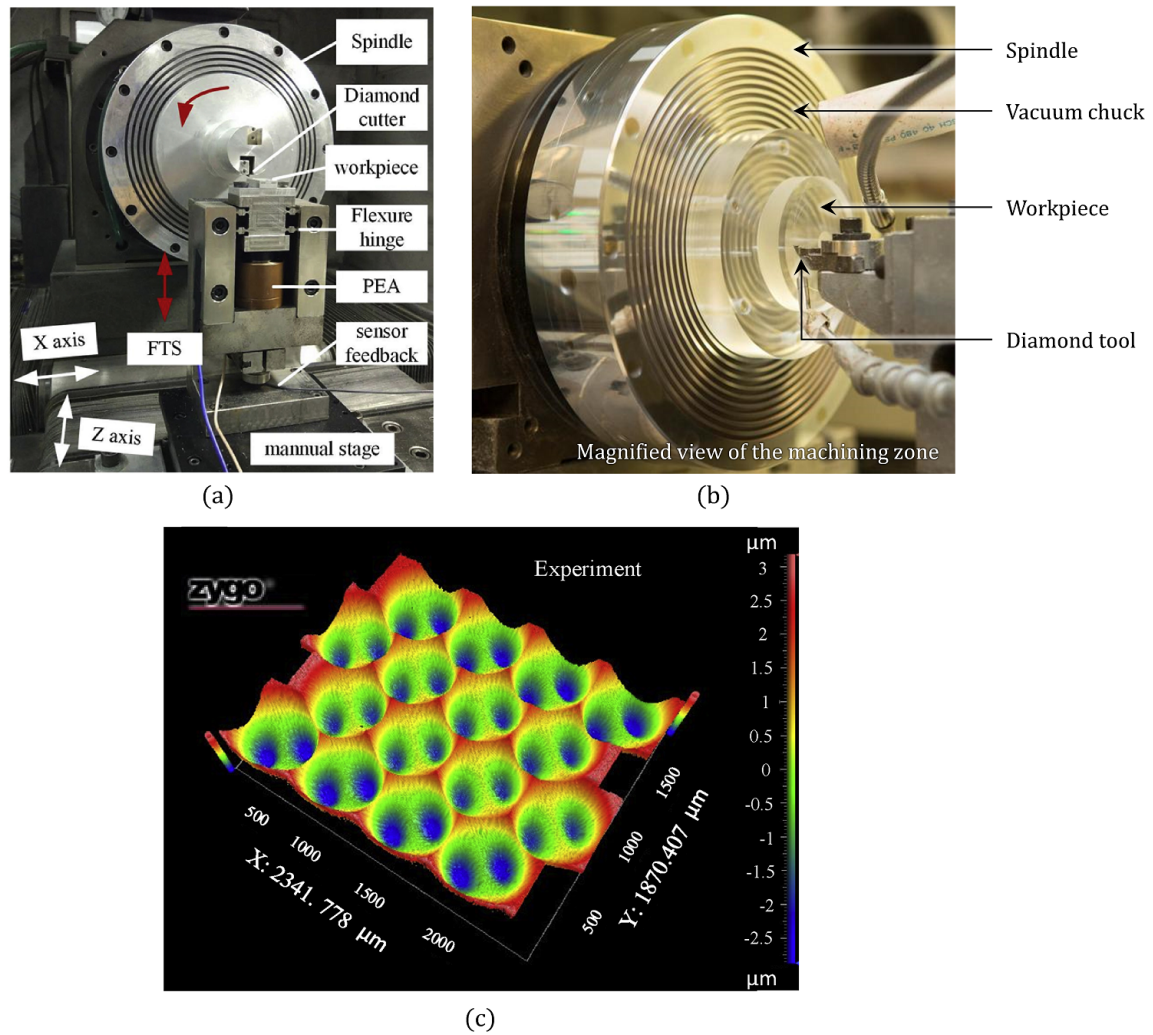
(a) Diamond turning of aluminium alloy to fabricate microlens array; (b) Magnified view of the machining zone in diamond turning; (c) 3D profilometry of the machined surface of 4×4 hexagonal microlens array [3]
